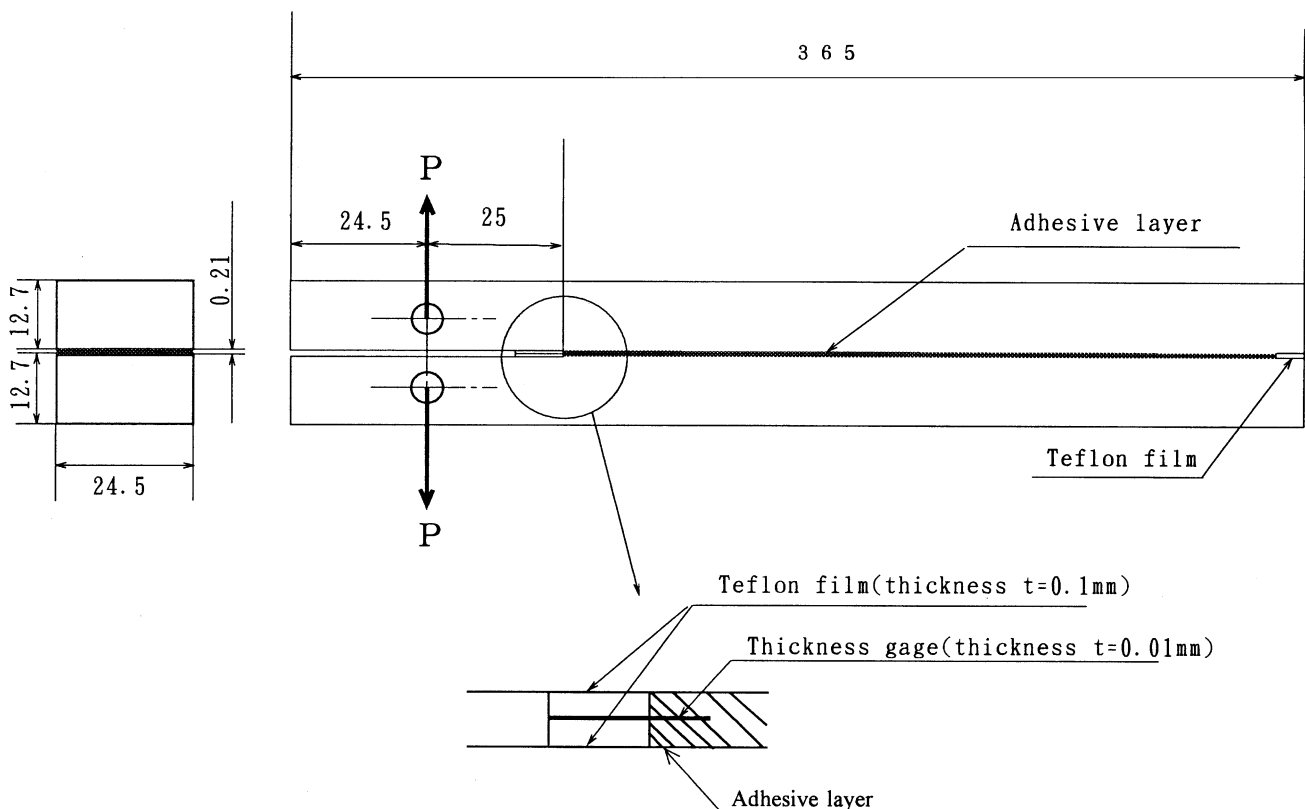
Shape and sizes of the adhesively bonded DCB specimen.
